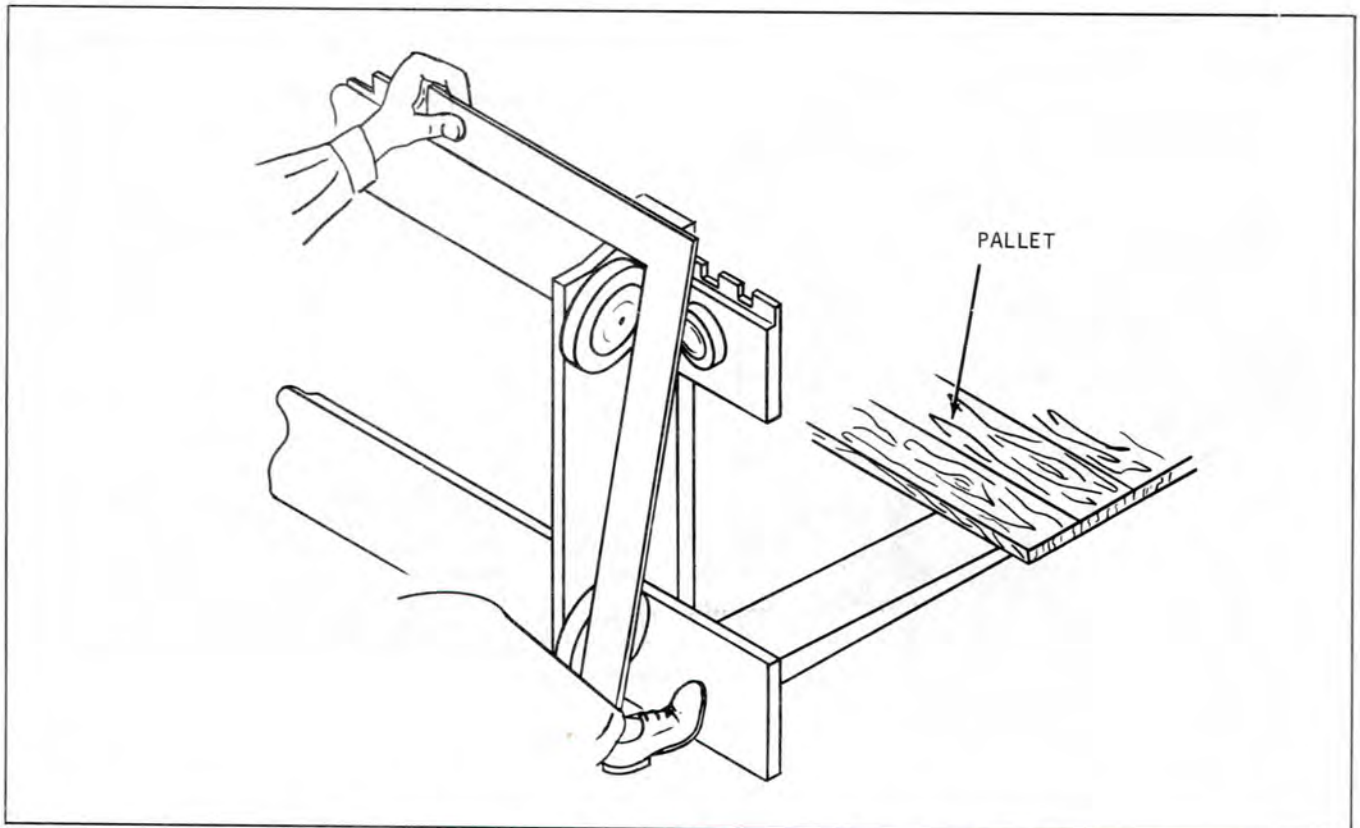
Squaring Carriage Rollers (Four Roller Carriage)
